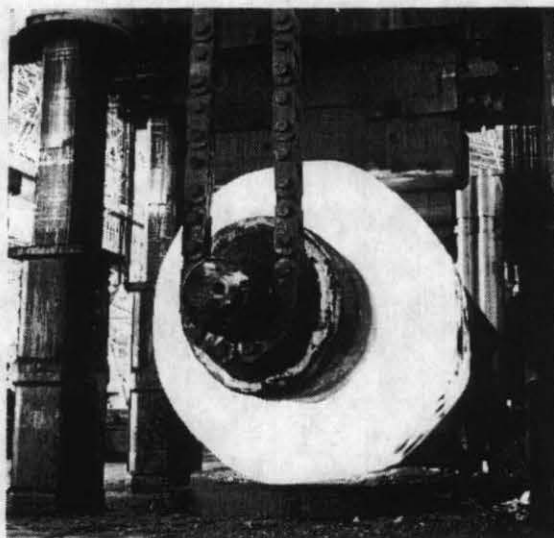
Forging of shell material by Kobe Steel 13,000-ton press machine
